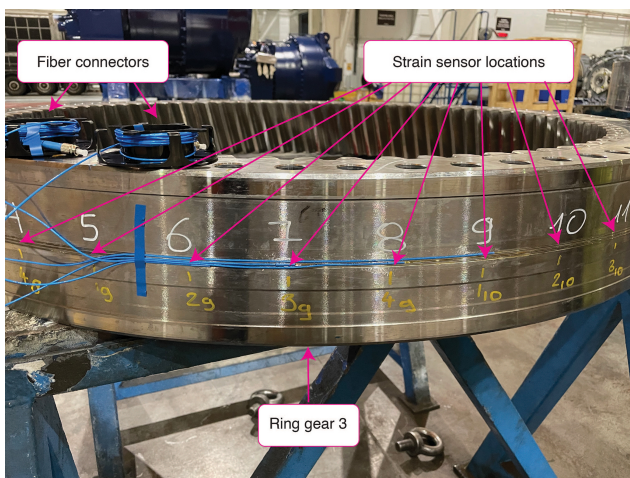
Details of fiber-optic sensors installed on the third-stage ring gear.
